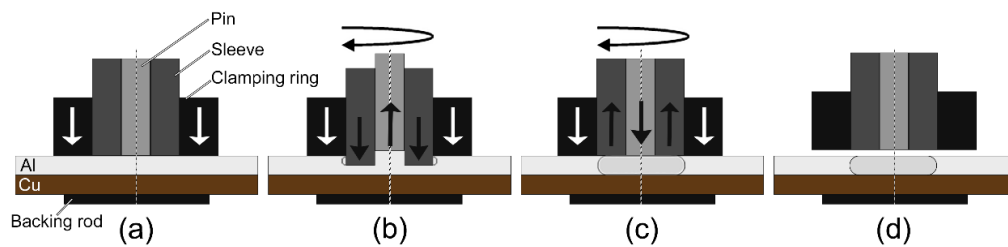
Schematic representation of the FSpW process - sleeve penetration variant: (a) clamping and spindle rotation; (b) sleeve plunges into the upper sheet while the pin moves upward; (c) spindles retract back and (d) withdrawal of the welding head.
